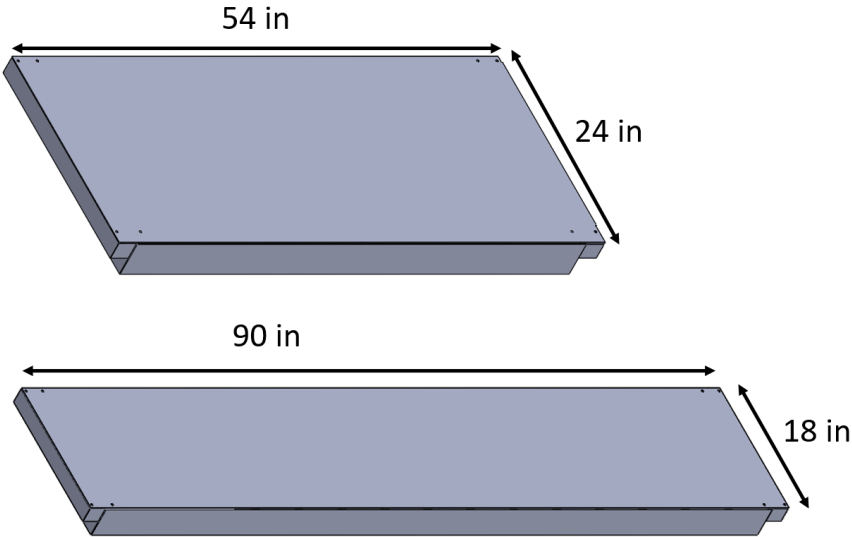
Top: Conditioning section roof panel. Bottom: Test section roof panel.
